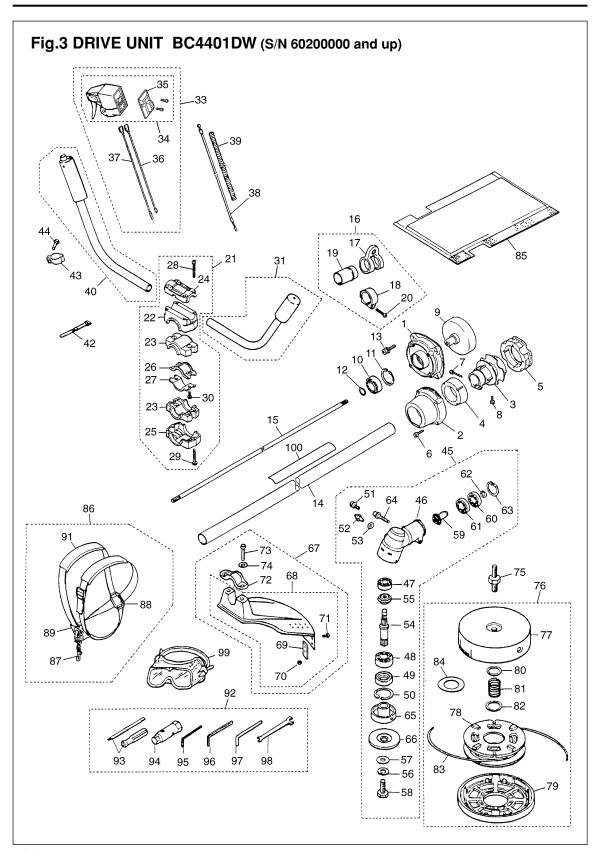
DRIVE UNIT BC4401DW (S/N 60200000 and up)
